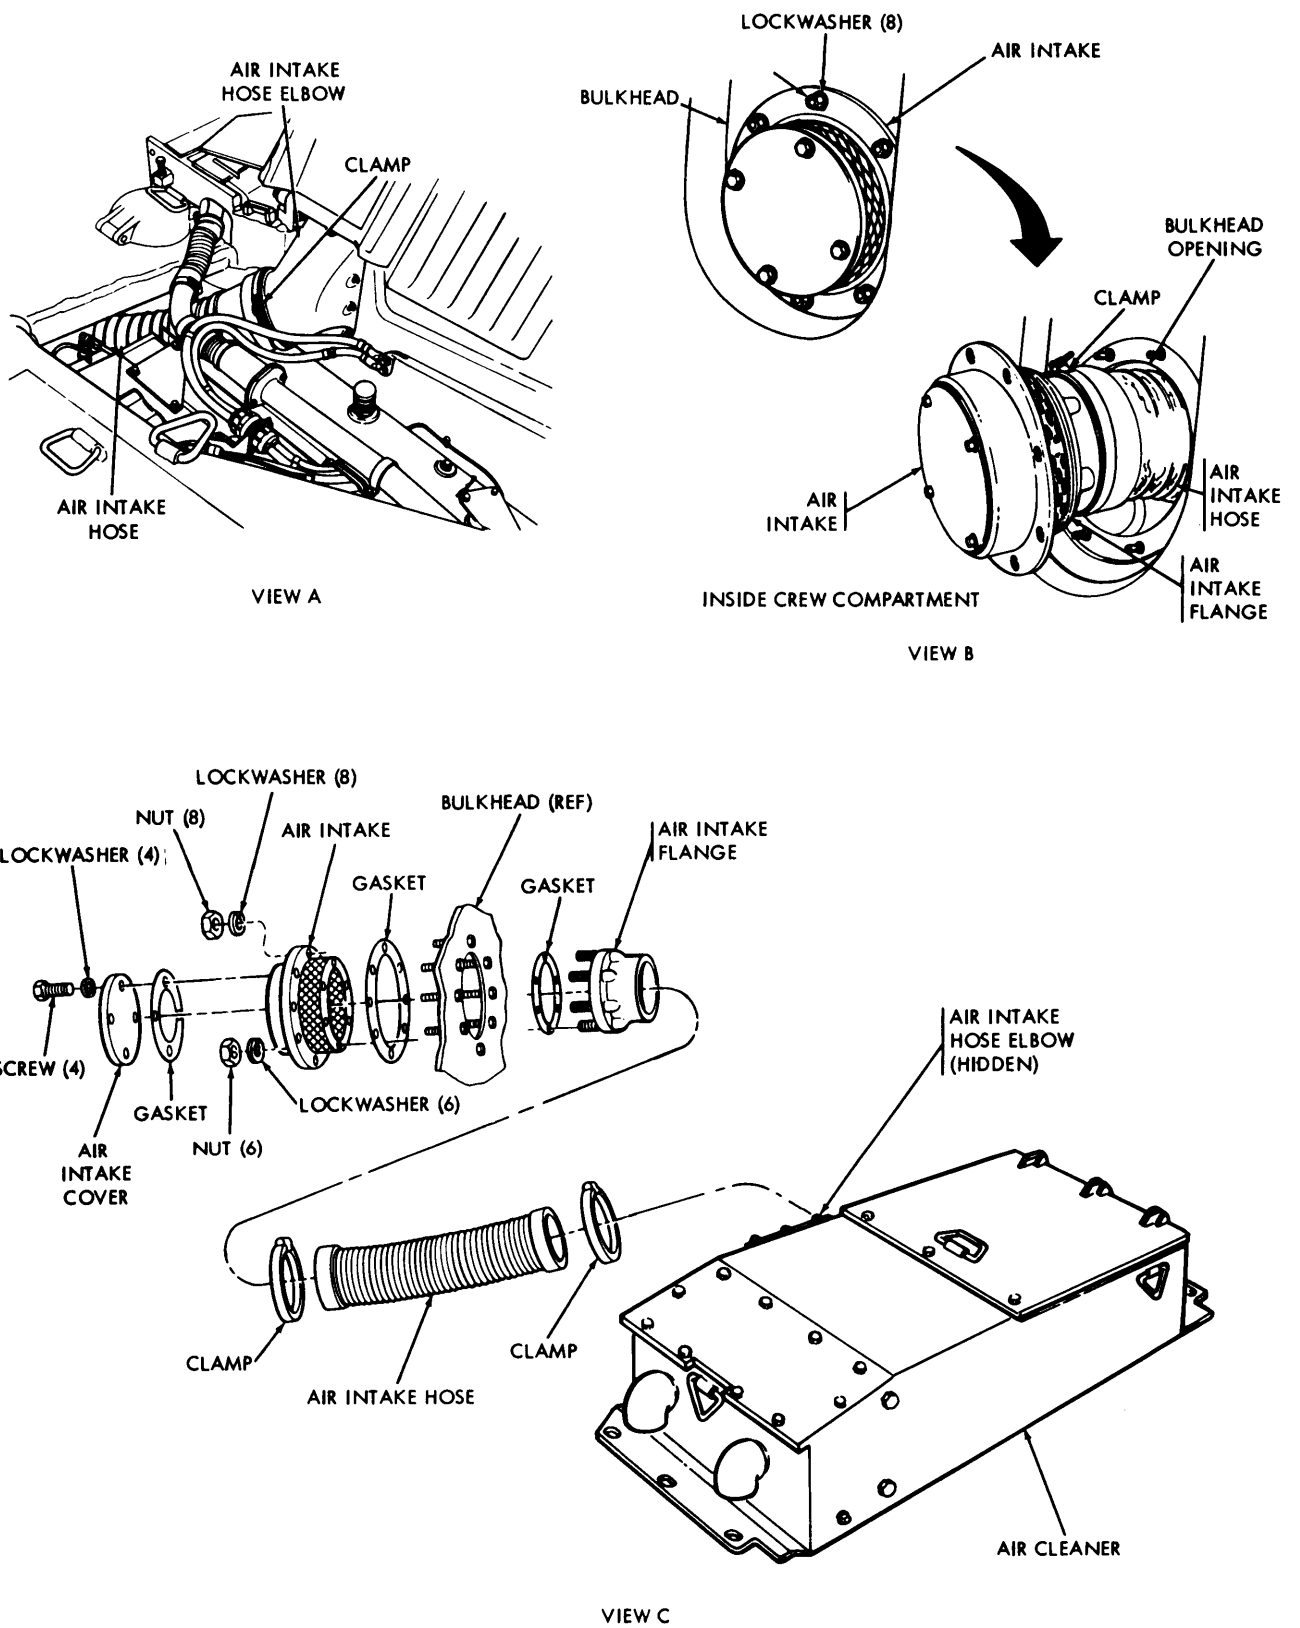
Air cleaner hoses, air intake gaskets and screens replacement (sheet 1 of 2).
